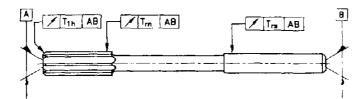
Run Out Tolerances for Reamers with Parallel Shank
